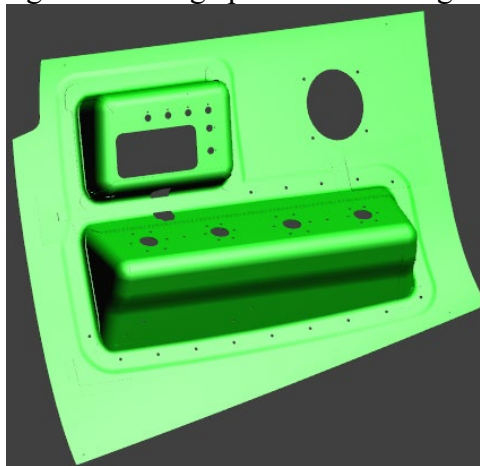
Depiction of pan-assembly challenge part (RI-RAPM-004). Dimensions, approximately: 760 mm (30 in) wide; height of left side, 760 mm (26.5 in); height of right side, 500 mm (20 in); rectangular deep-draw section 57 mm (2.25 in) deep; and the triangular deep-draw section 114 mm (4.5 in) deep.
